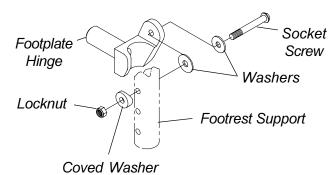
INSTALLING ADJUSTABLE ANGLE FLIP-UP FOOTPLATE HINGE
